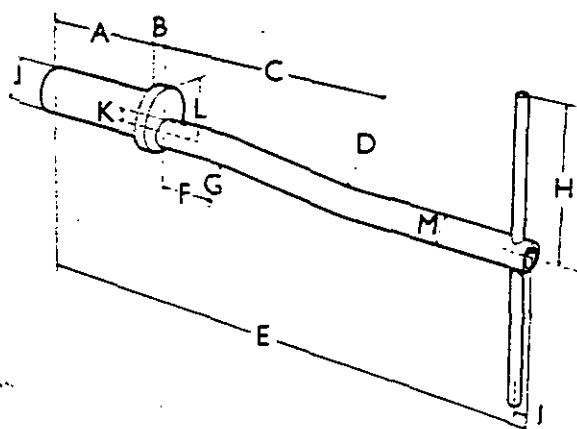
TOOL FOR REPLACING DIFFERENTIAL LOCK SLEEVE
